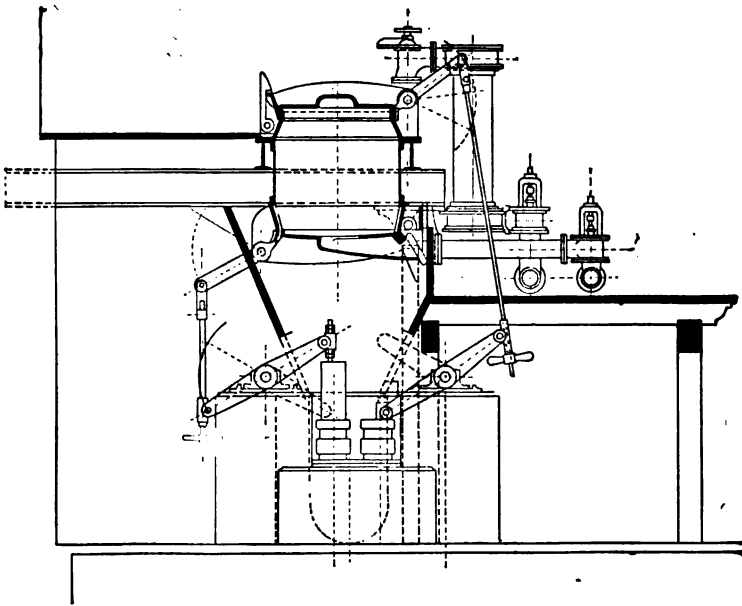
MAERKY and BROMOVSKY Hydraulic and Automatic Bottom Closing Device.
